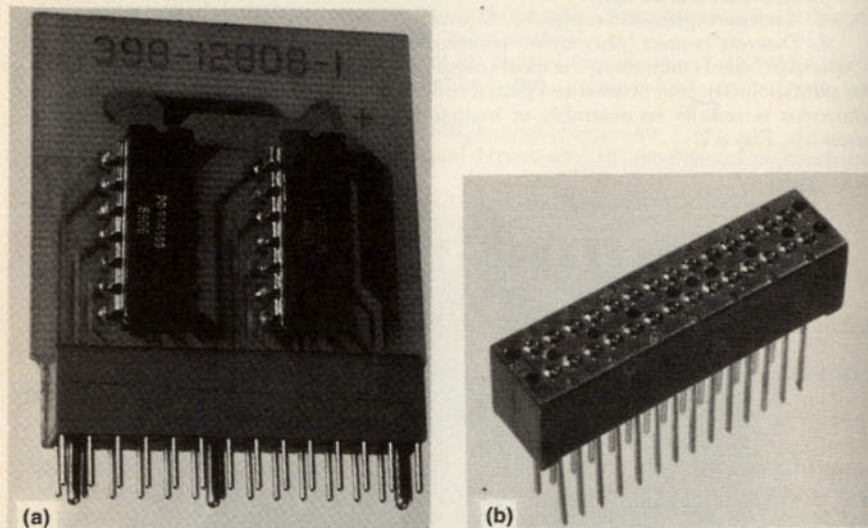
(a) Two-part connector, printed board assembly (with plug half); (b) two-part connector (receptacle half).
